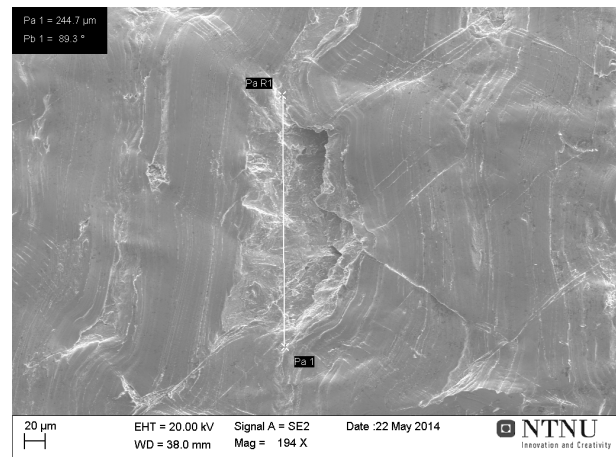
Shows the side of one of the standard tensile test specimen of Alloy 718. Few secondary cracks are observed at this magnification.
